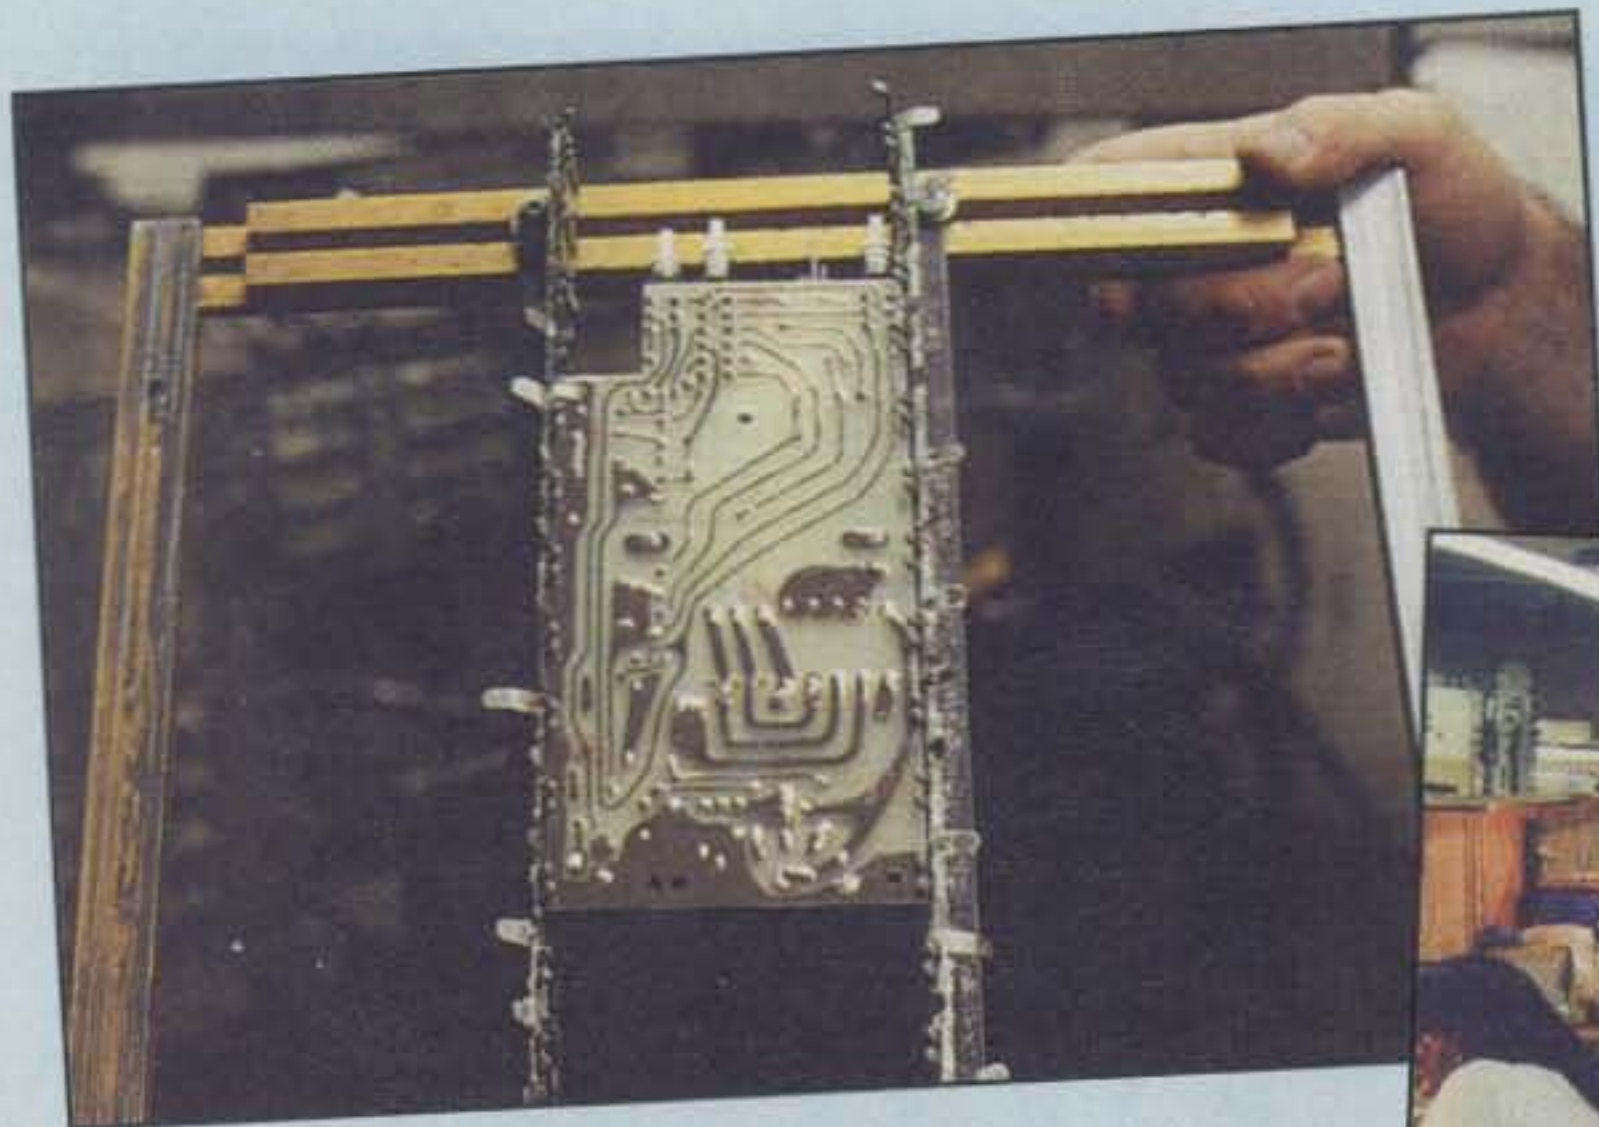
Newly wave-soldered board will cool before moving on to testing and assembly. The solder sticks only to areas that have been treated ahead of time and covered with flux when the board enters the wave soldering machine.
